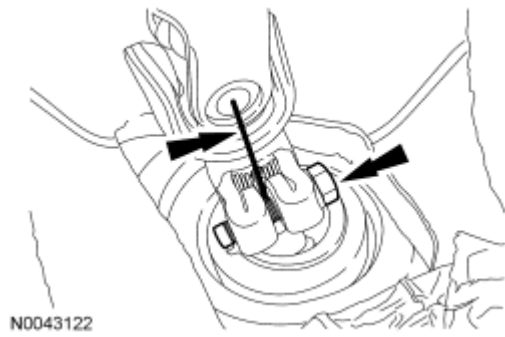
Locating Steering Column Shaft Index Mark And Bolt
